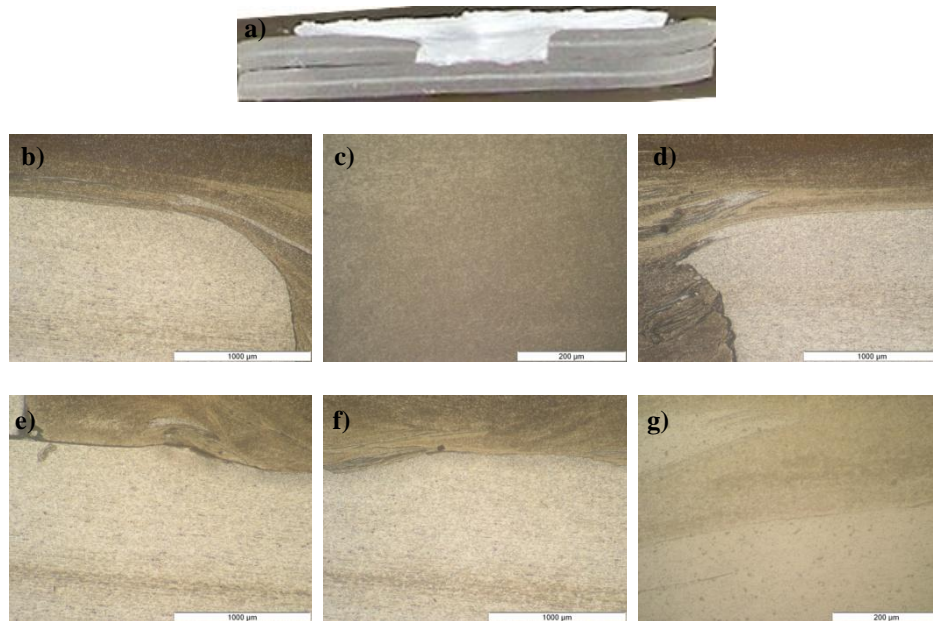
Microstructure of the samples welded by tool 1: a) macrography of the welded sample, b) top corner nugget near the upper surface, c) nugget, d) top corner opposite side, e) bottom corner nugget joined with bottom and side surface, f) joint of nugget with bottom surface and g) joint of nugget with bottom surface at higher magnification.
